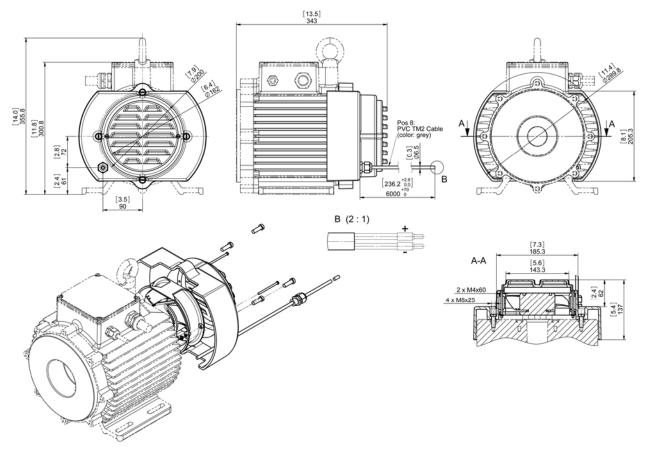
Basic dimensions (in mm and [inch]) LPM-4000 motor with FCM-4000.1 Fan Cooling Module
